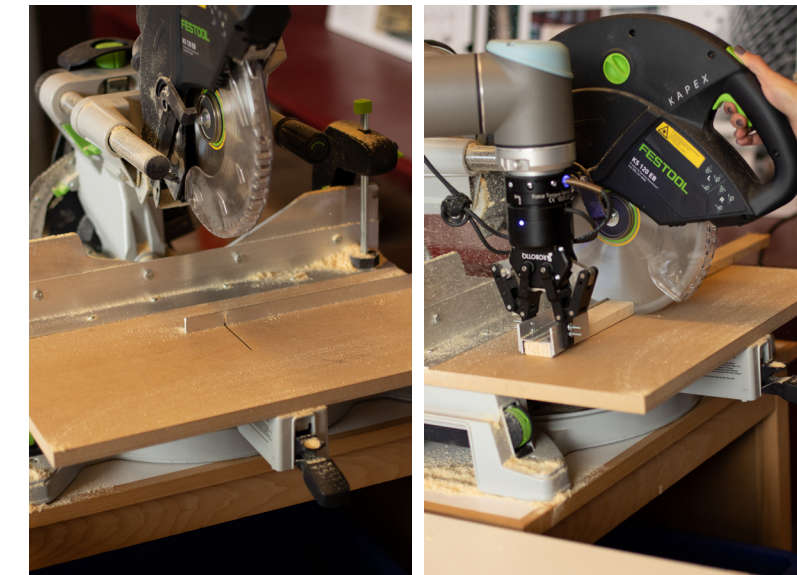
The board that is attached to the saw to providing another back support for where a component will be placed.
